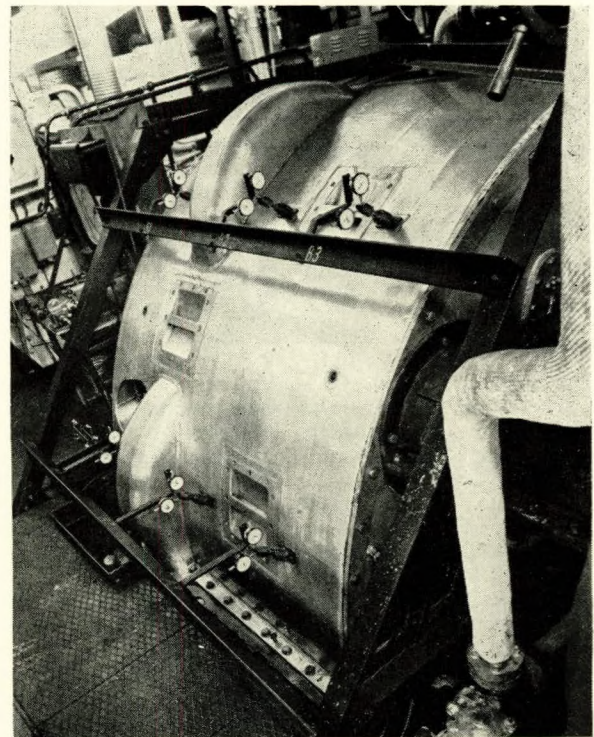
Y.E.A.D.1—L.P. side showing distortion frame and dial gauges
